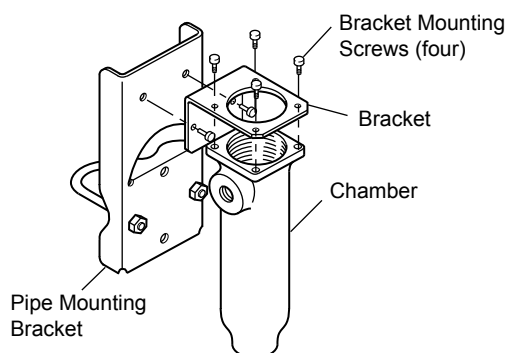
Bracket for Fixing the Polypropylene Resin Holder
